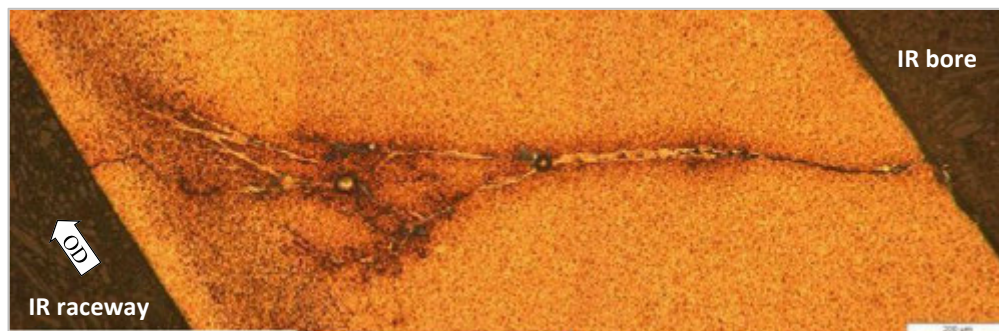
Circumferential LOM of a specific NTN-SNR DGBB IR tested on a Machine S with highly additivated lubricant B: WEA form aside cracks that initiated at the IR bore due to intense fretting.
